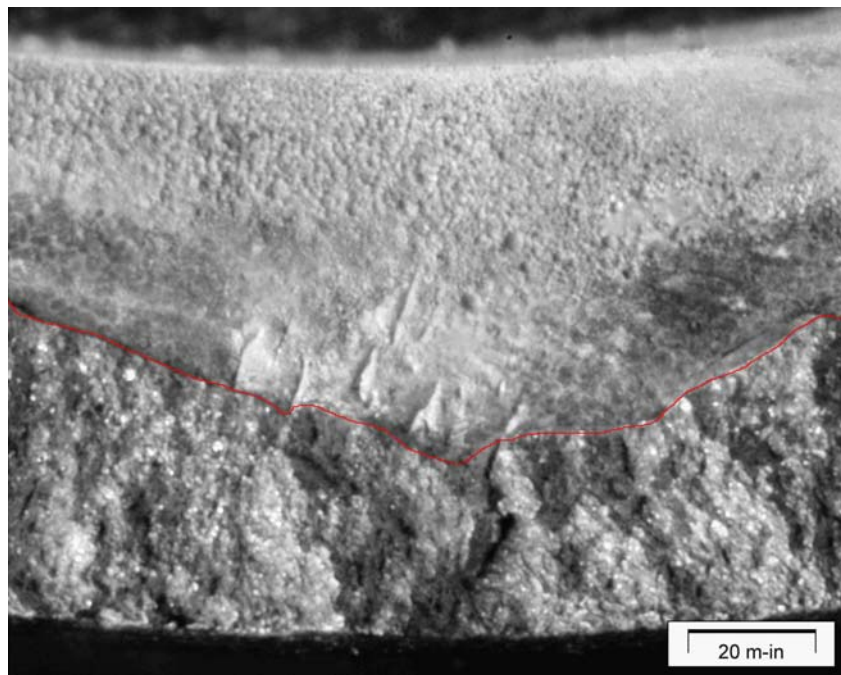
Elbow side fracture half depicting failure origin from large cracks at weld root, from right of figure 13.
